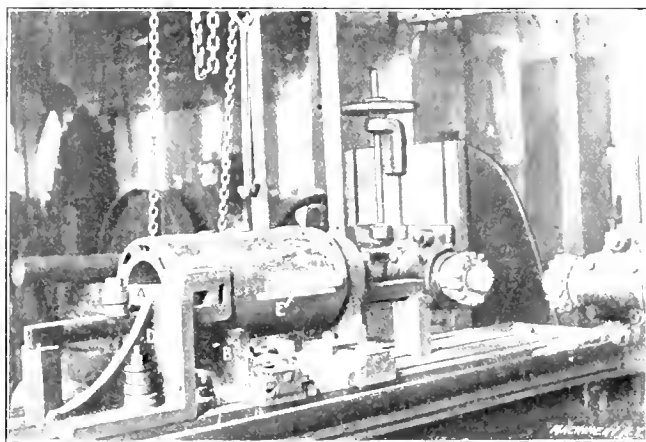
Milling Bottom and Side of Cylinder Ways on Double-head Milling Machine
